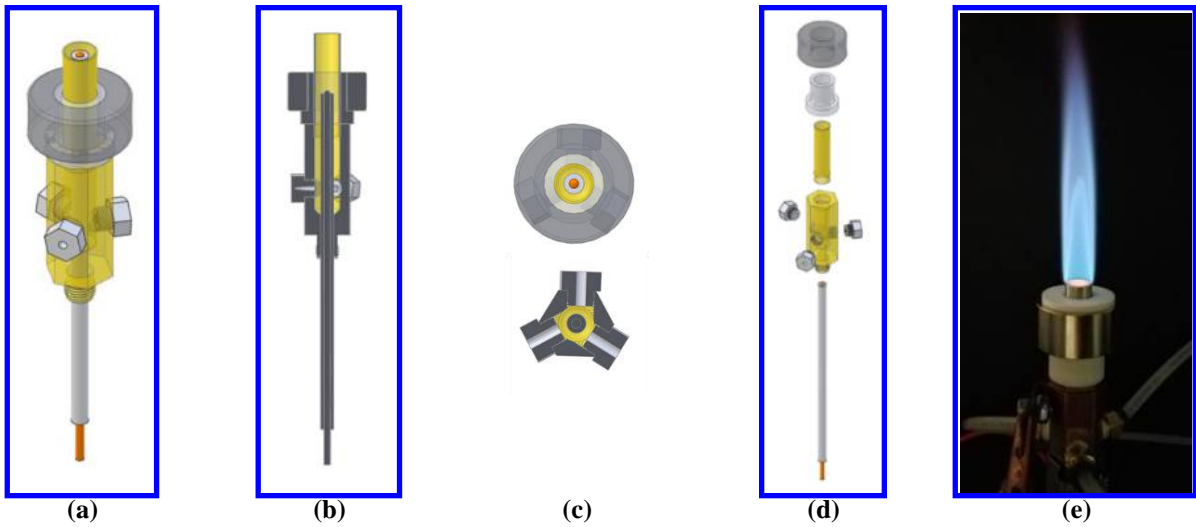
CAPAC Type 1 Revision E: (a) isometric (b) side-view sectional cutaway, (c) top view of magnet and sectional cutaway of plenum, (d) exploded view, and (e) image of fuel-rich methane-air flame with inner and outer cone and plasma excitation
